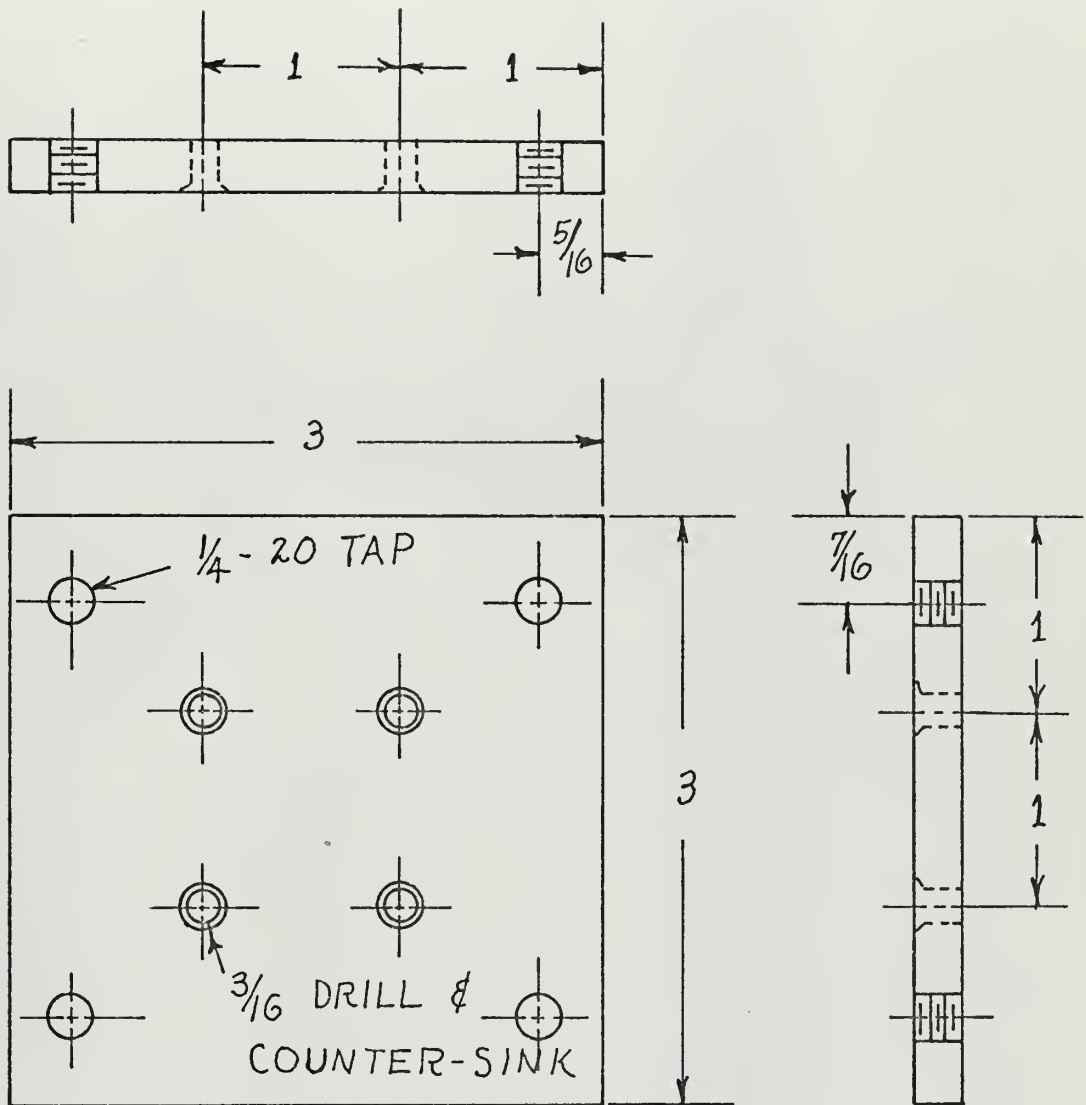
Detail drawing of the swivel assembly mating plate for the NPS Vane Shear Apparatus
